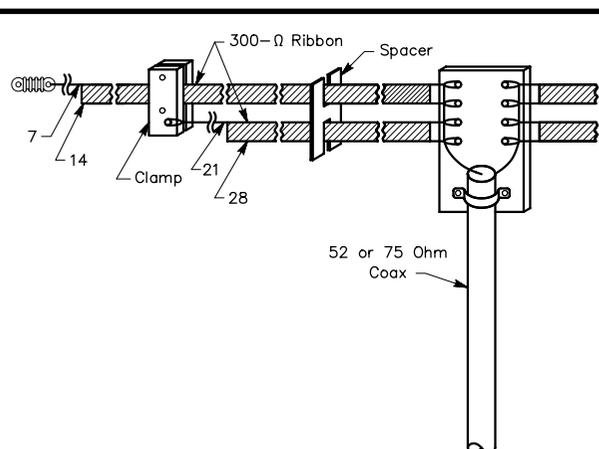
Sketch showing how the twin-lead multiple-dipole antenna system is assembled. The excess wire and insulation are stripped away.
